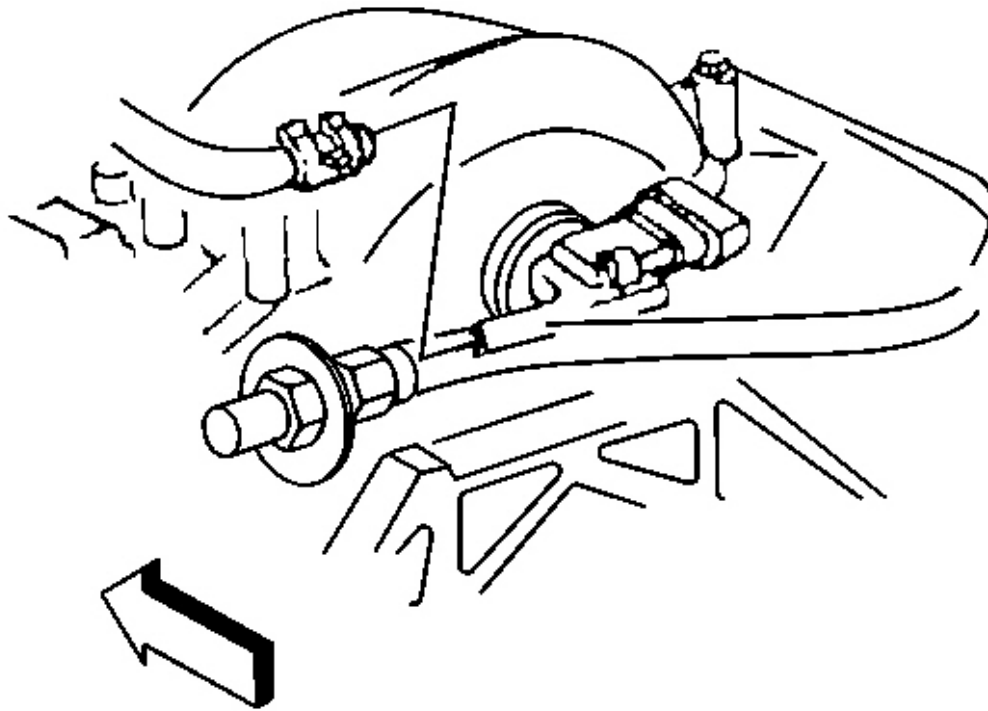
Brake Booster Vacuum Hose To Intake Manifold
